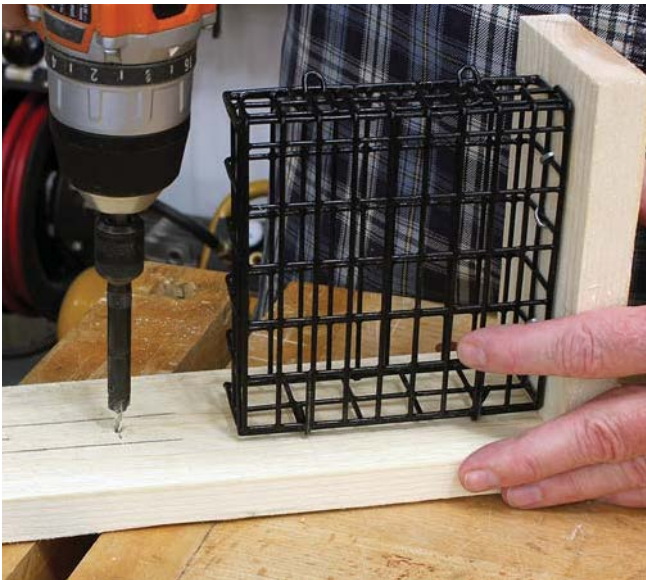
Position the supports assembly beside the basket and outline it in pencil so you can drill pilot holes.
